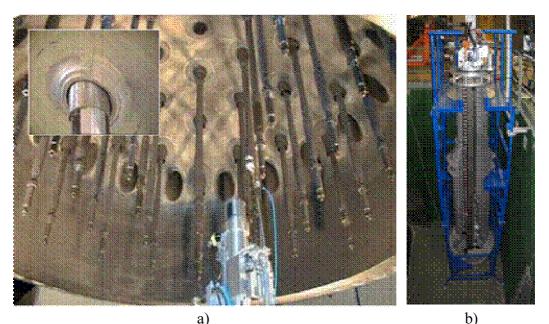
a) Tecnatom's RPV head penetration inspection system, b) WWER SG collector and tubes inspection system
